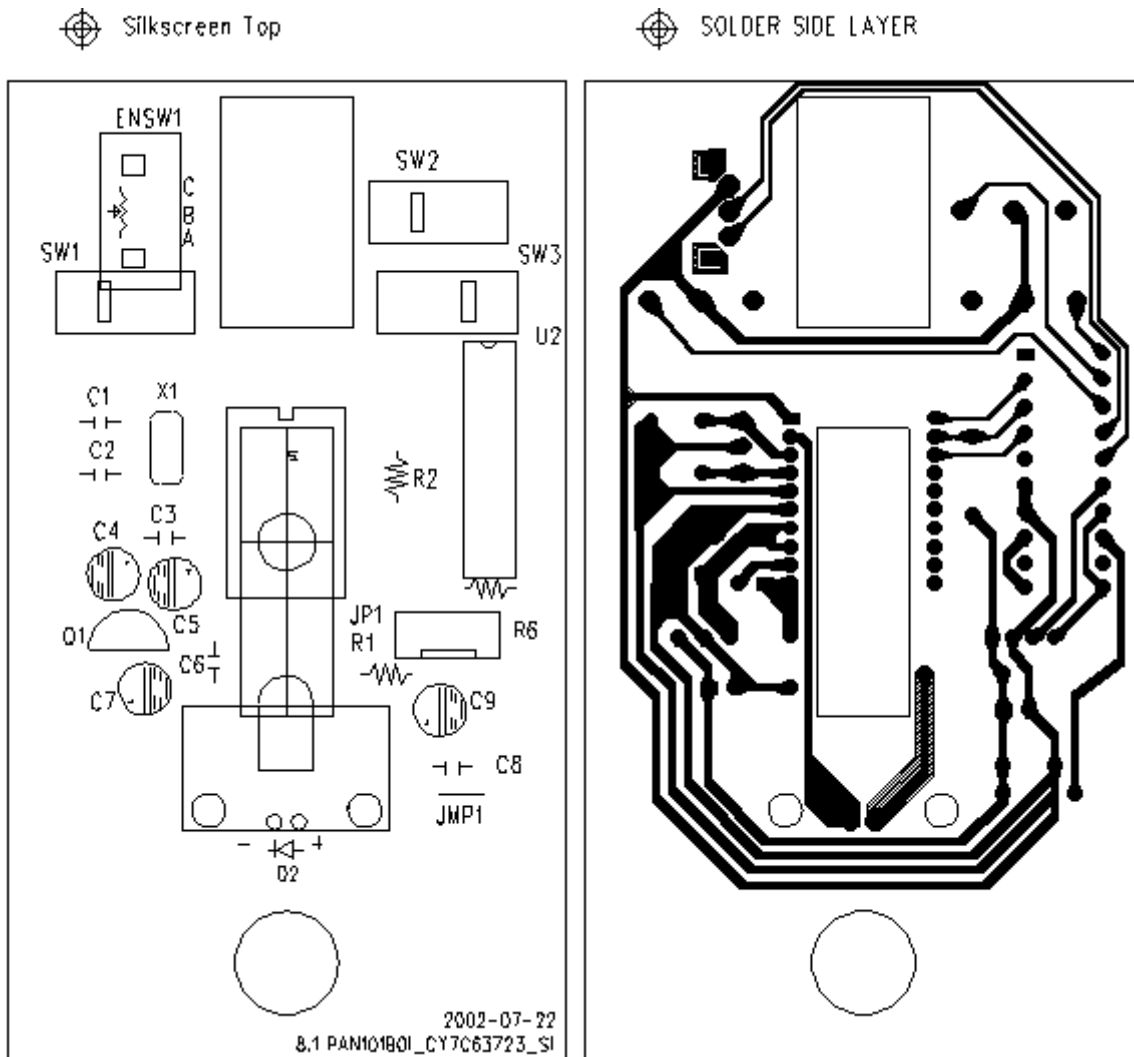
Example printed circuit board layout. (PAN101BOI V.S CY7C63723-PC)
